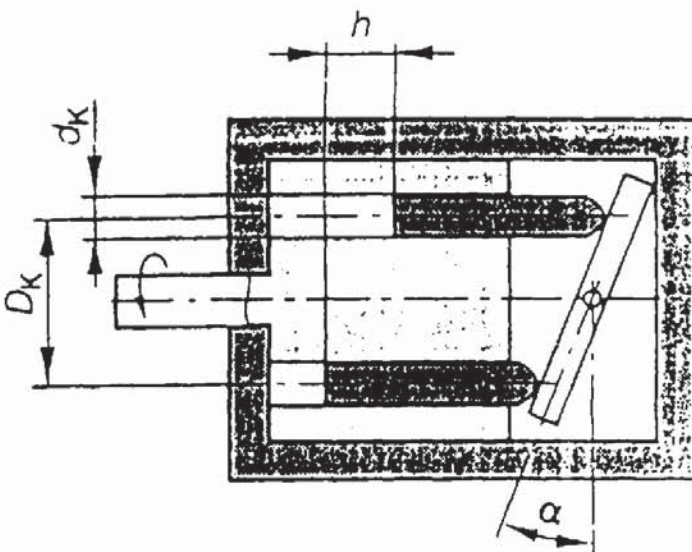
Sketch of an axial piston pump swash-plate design showing displacement angle α .
